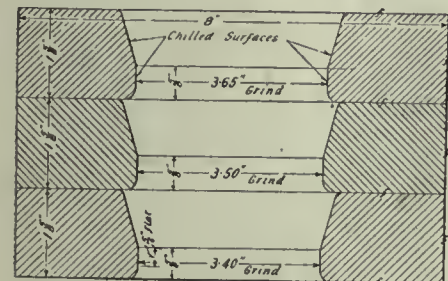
CHILLED CAST IRON DRAW RINGS.
